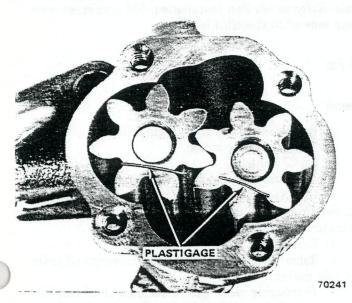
B-72 Oil Pump Gear End Clearance Measurement—Plastigage Method
